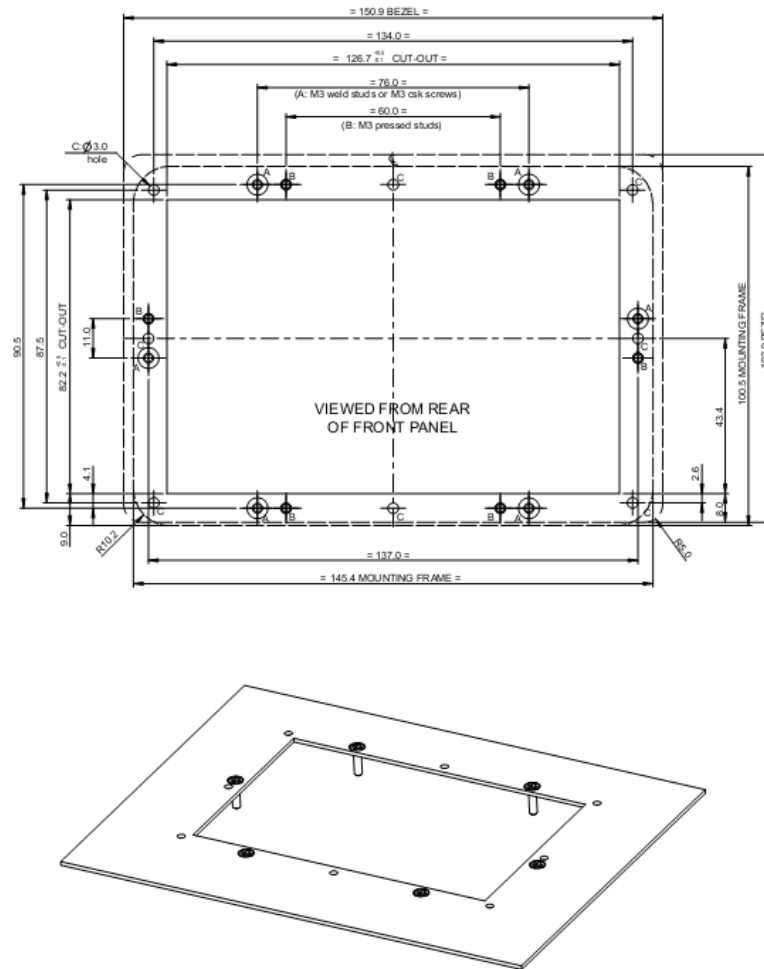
VM800B 4.3" panel mount dimensions
